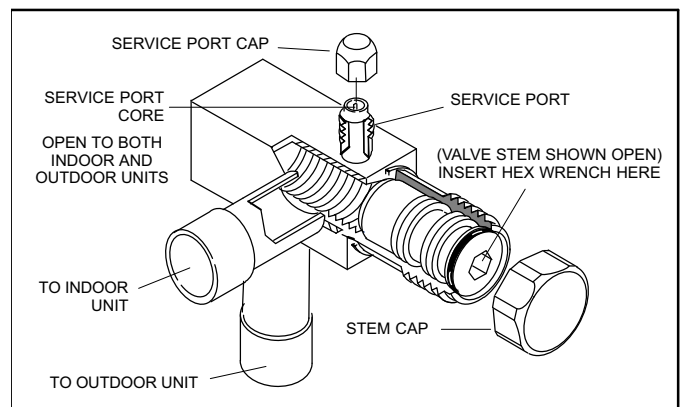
Angle-Type Service Valve (Back-Seated Opened)
